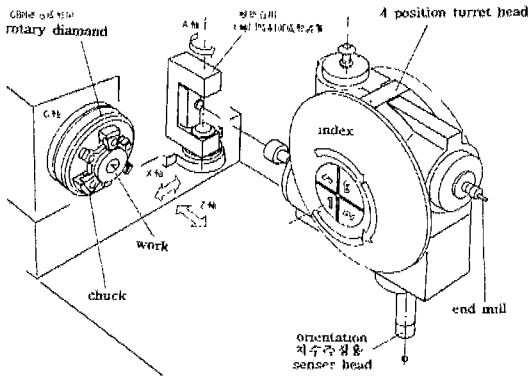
CNC operated turreted tools and dressing apparatus
